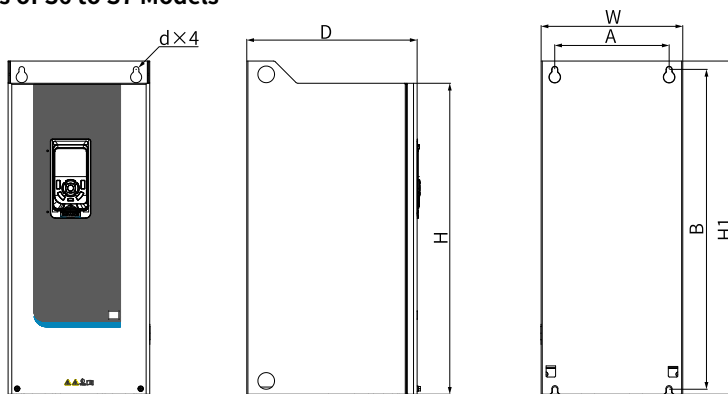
Outline dimensions and mounting dimensions of S6 to S7 models
